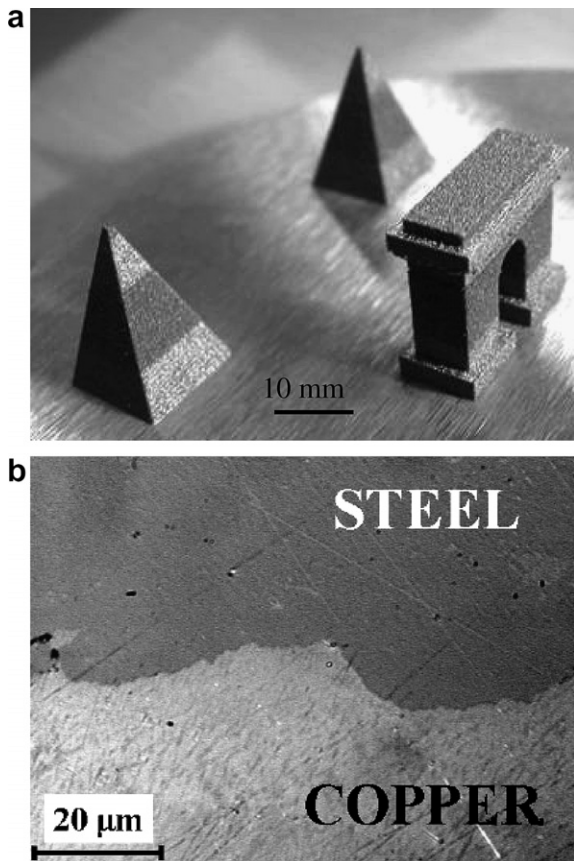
Bi-material models (stainless steel/Cu) fabricated in a two-step SLM manufacturing cycle: (a) general view, (b) cross-section of the sample.
